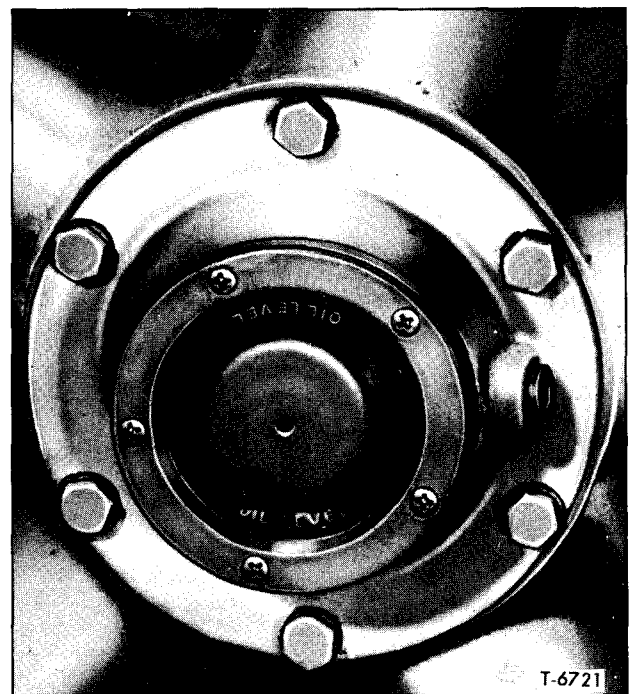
Oil Level (Oil Lubricated Type Bearings)
